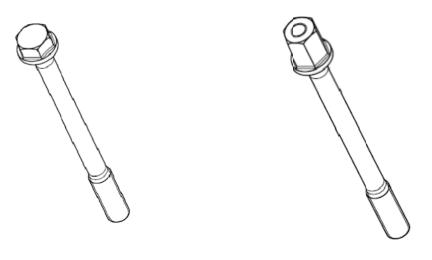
Cylinder cover main bolt (Left) Cylinder cover main bolt for hanger plate (Right)
